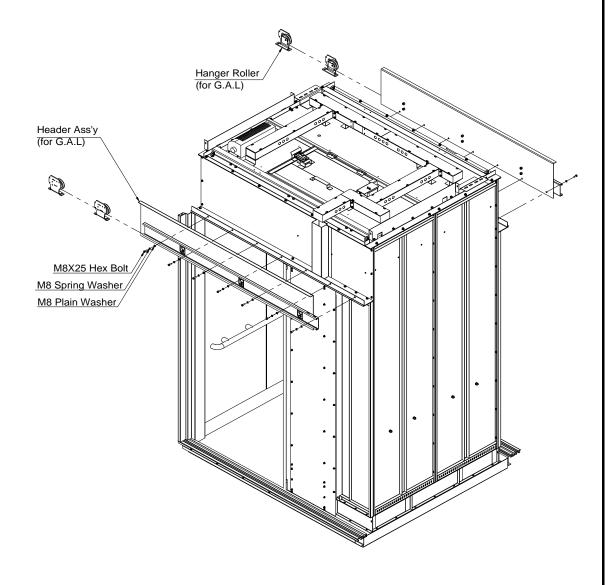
A. INSTALLATION CAR HEADER (FRONT and REAR ENTRANCE)
